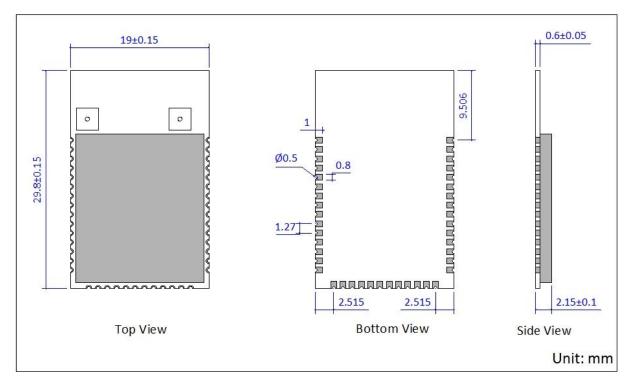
Overall Dimensions of BDE-RFM208-IN
